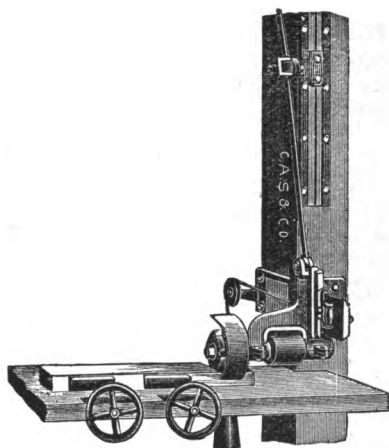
PATENT GAINING OR CROZING MACHINE.
